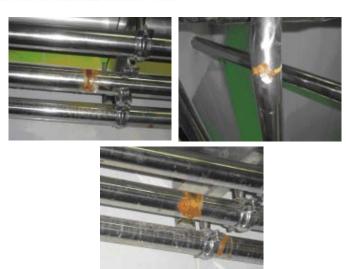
Corrosion in pipes, around the fillet weld
